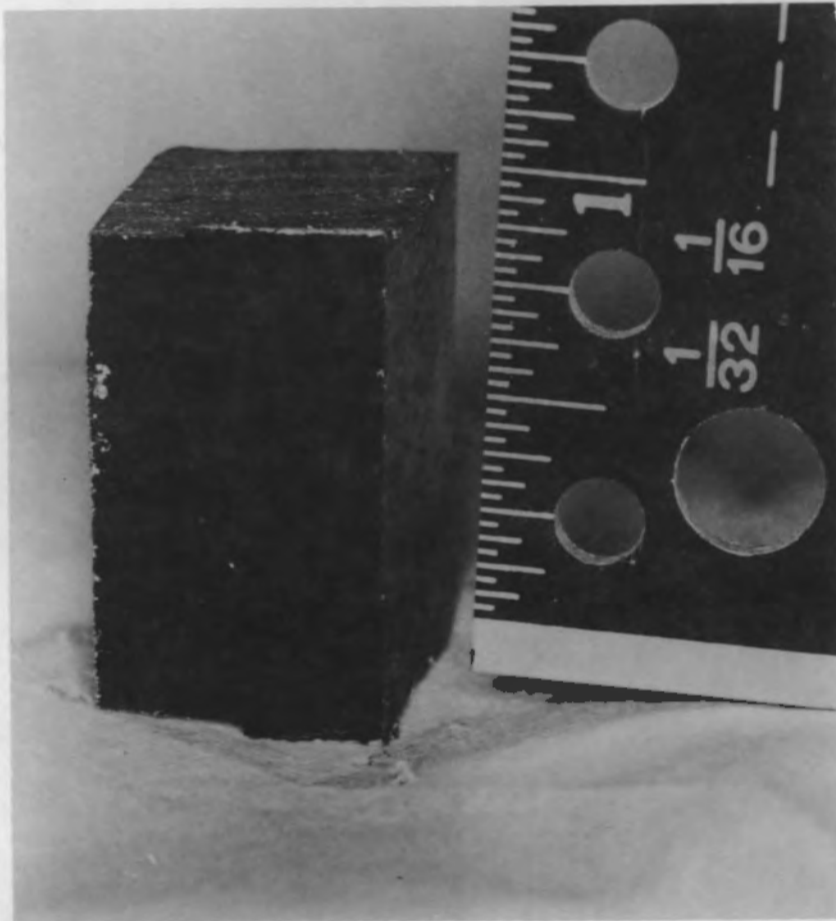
Coupons From the Stainless Steel Cold Leg Manway Cover Insert
